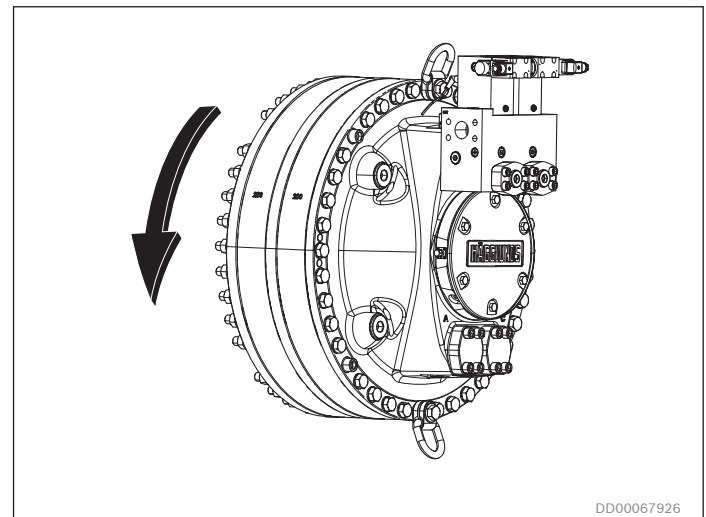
CB valve mounting position for clockwise drive shaft rotation as viewed from motor shaft side. INL (A) port on valve connected to C port on motor
